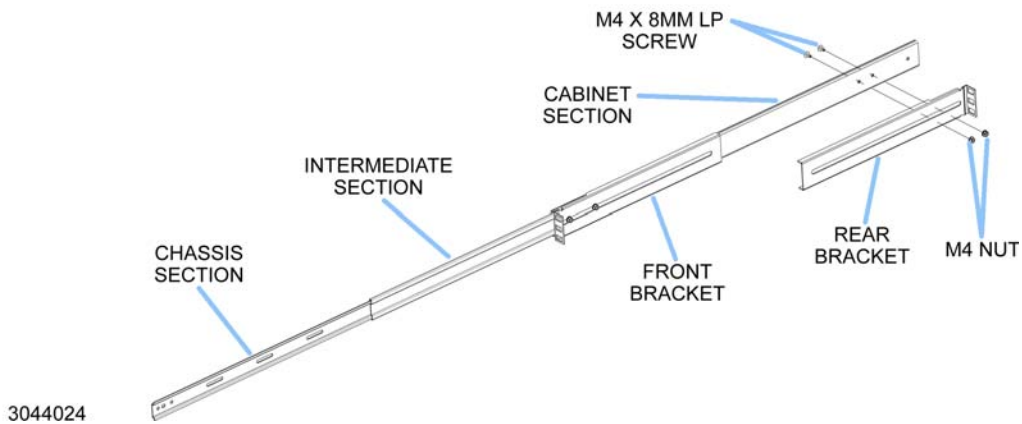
CHASSIS SLIDES COMPONENTS, SHOWN EXTENDED
